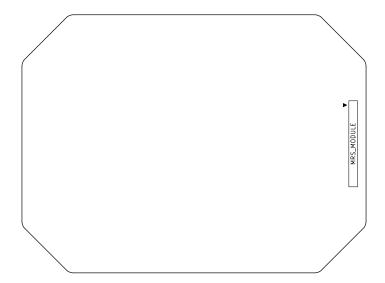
MRS MODULE - UVDAR: Connectors Placement, Bottom Layer
